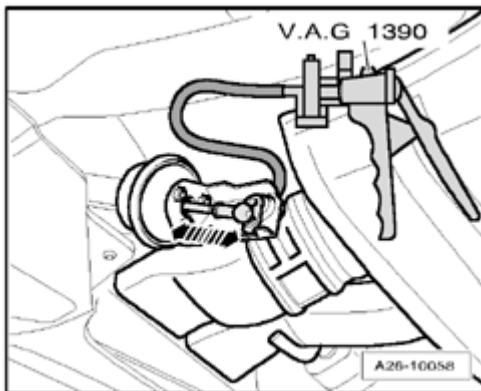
Exhaust Flap Vacuum Reservoir, Checking
